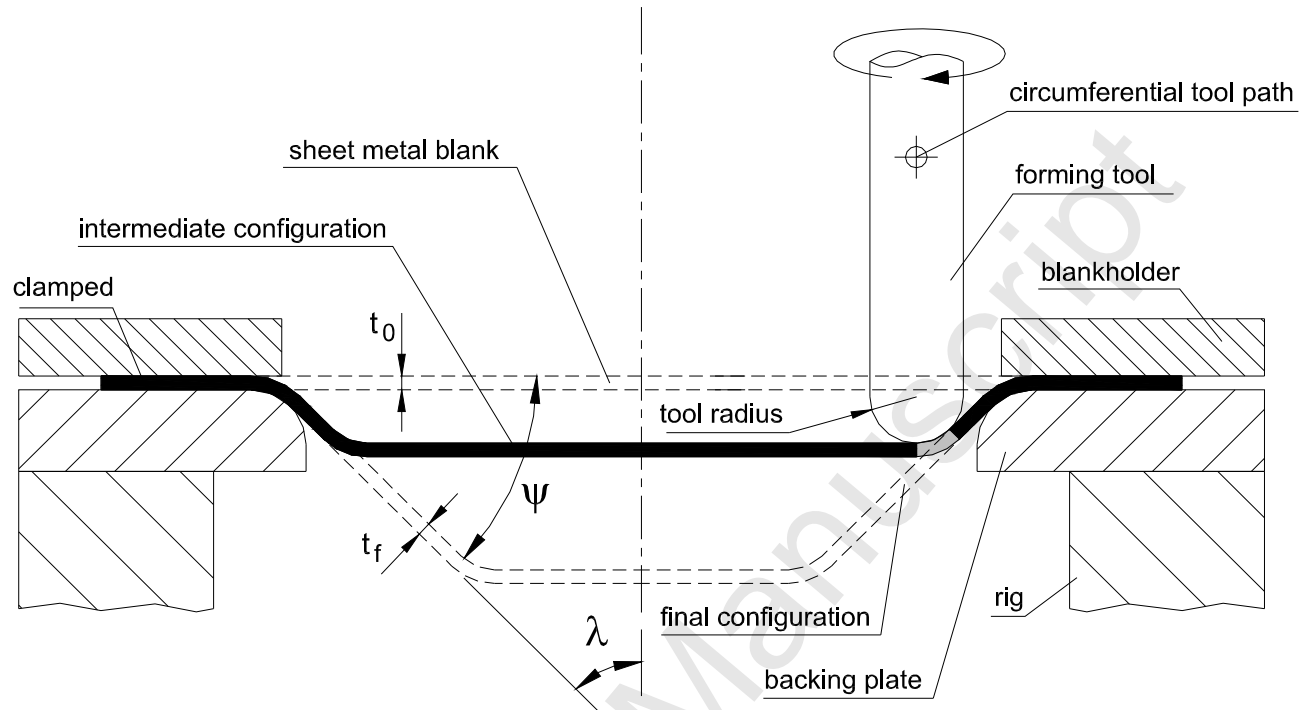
Schematic representation of a cross section view of the rotational symmetric single point incremental forming (SPIF) process. The tool rotates while performing a round (or helical) path.
